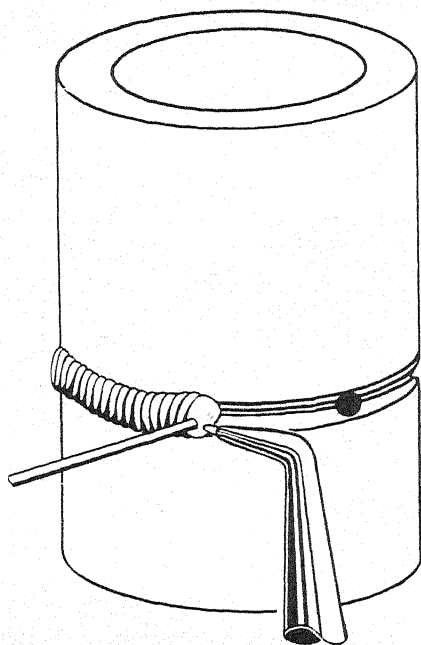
Horizontal weld on vertical fixed pipe.
